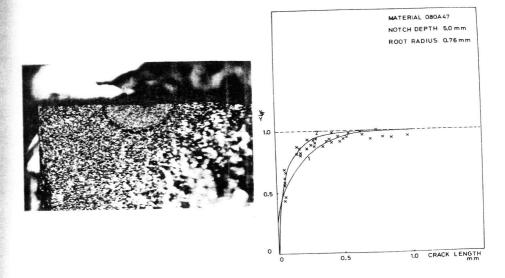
Fatigue crack shape at initiation. Mag. x24
